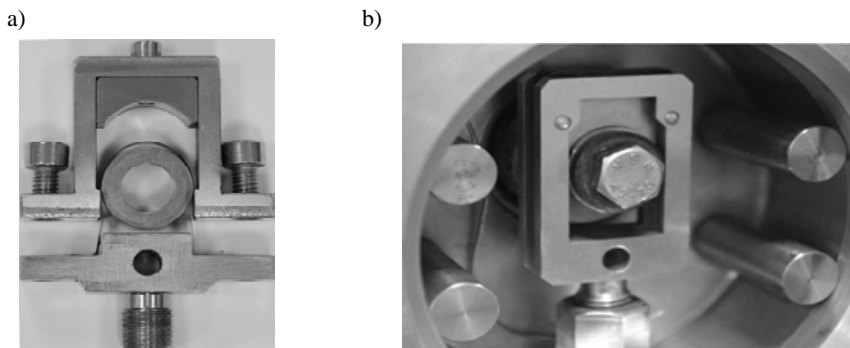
Mechanical part of T-27 tribological test device for testing materials dedicated to parts of foils bearings: a) overall view, b) draft
